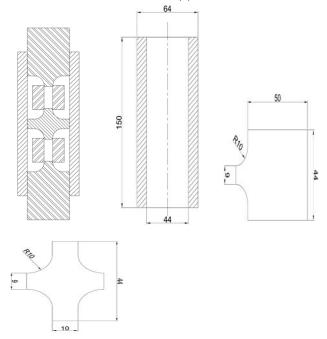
schematic drawing of the inversion tube die and its parts. All dimensions are in mm
